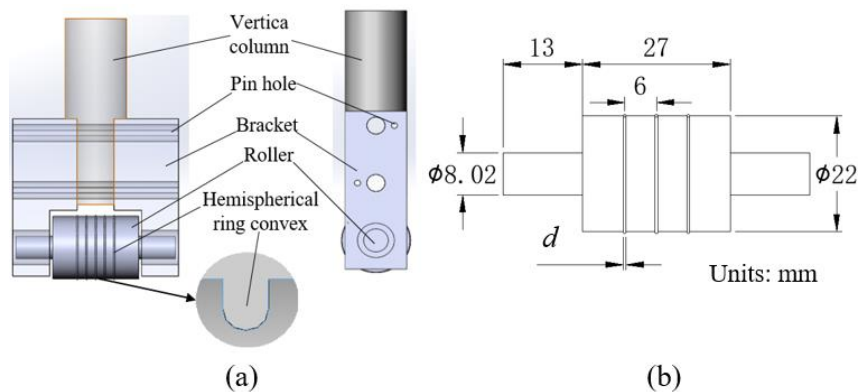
Rolling forming tool (a) Composition (b) Roller dimension.
